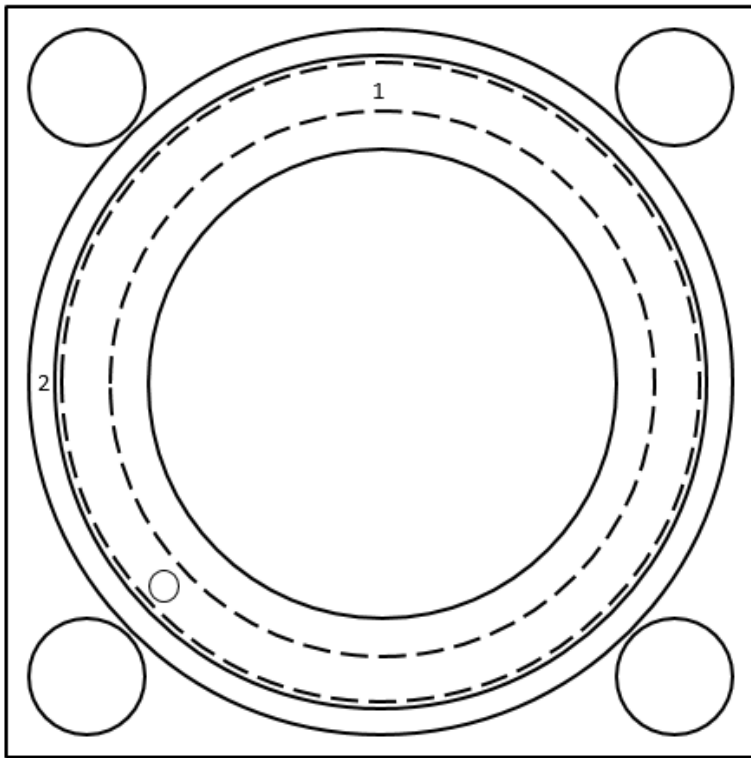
Schematic of Top View of Bottom Piece of Cooling Device. The Dashed Ring (1) Represents the Water Groove and the Solid Outer Ring (2) Represents the O-ring. Drawing not to scale.
